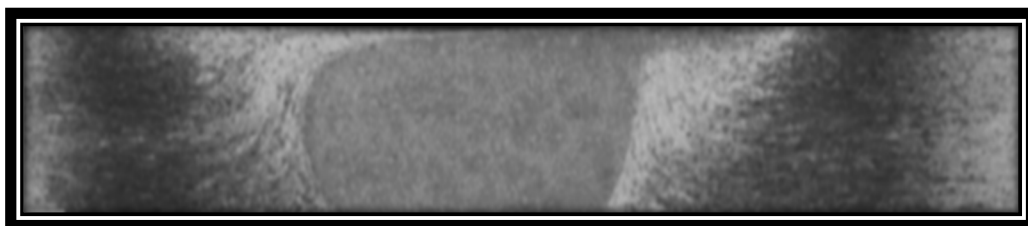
Macrostructure weld joint of Specimen (A) friction stir weld joint at (40x).
